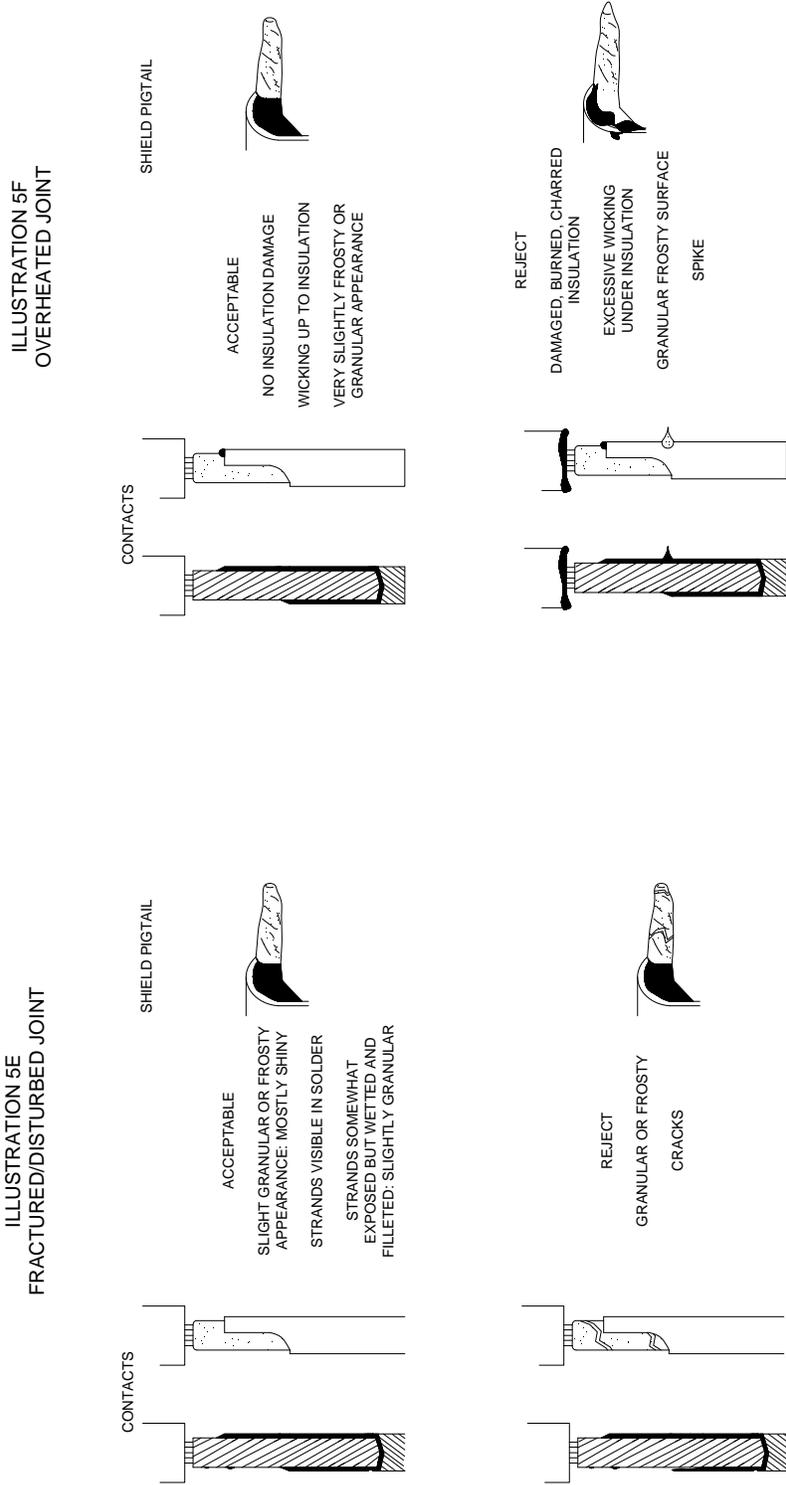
A6. Conductor contact soldering techniques - Continued.
